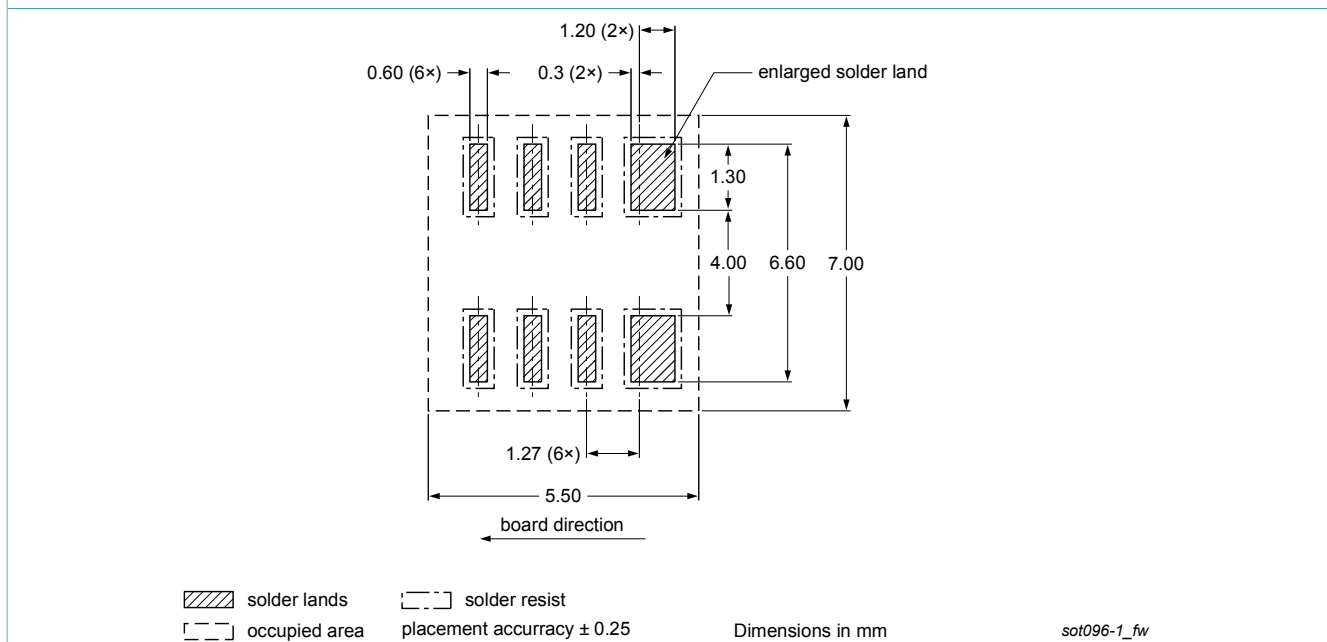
Wave soldering footprint for SO8 (SOT96-1)
